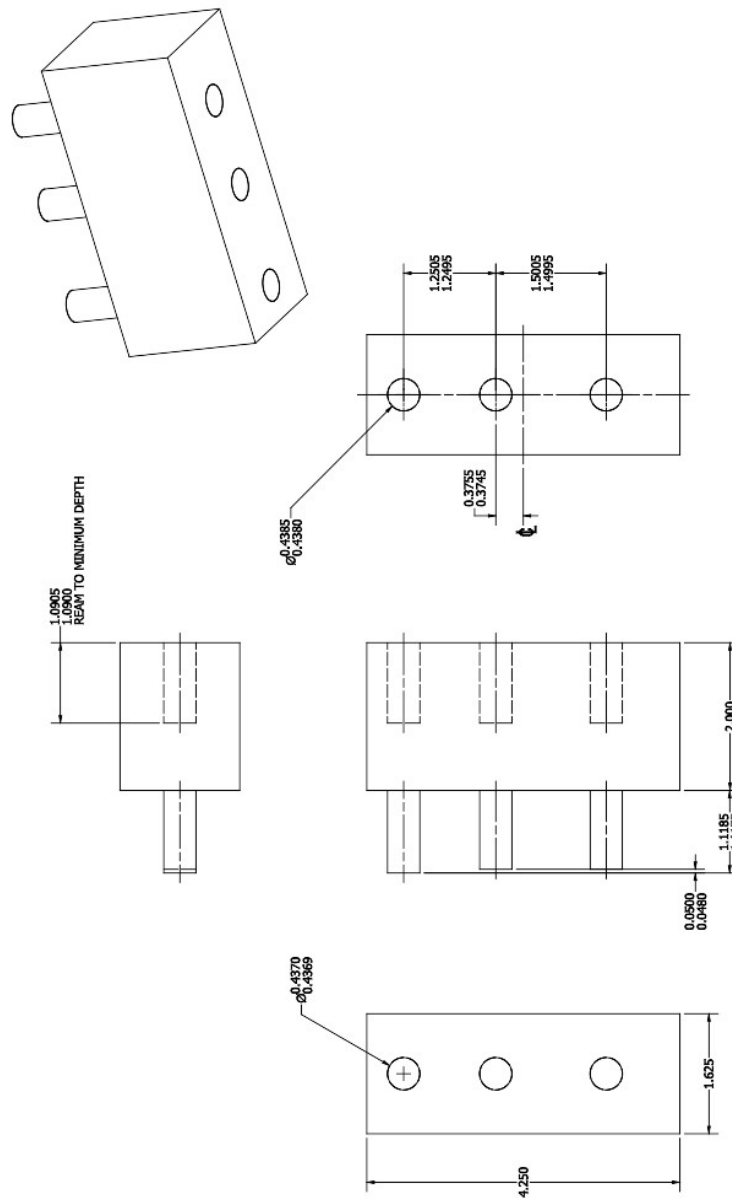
Pin and sleeve alignment test fixture - 100 ampere device (6T100)
